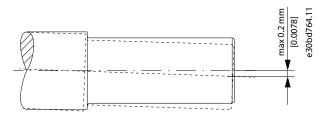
Maximum Eccentricity of the Conveyor Shaft
